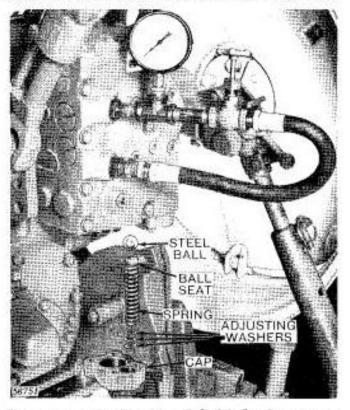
Checking Relief Valve Pressure in No. 2 Circuit of Dual Valve Housing; Location of Adjusting Washers
